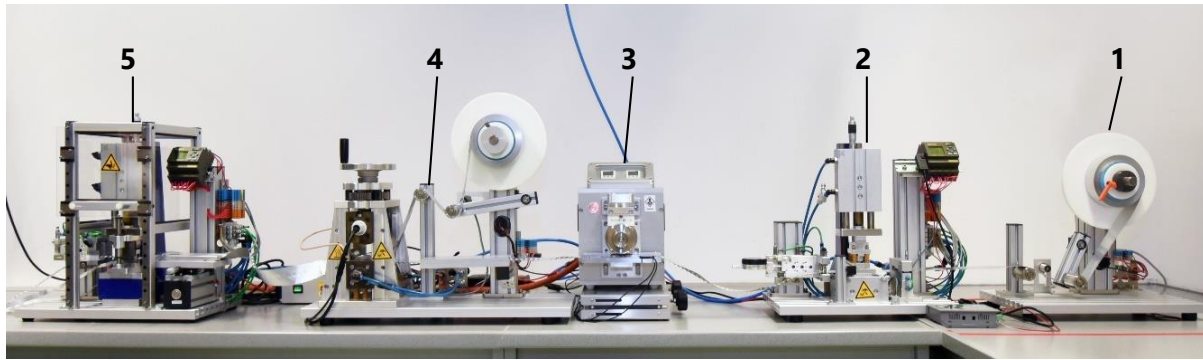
BI drum filler. From right to left: Foil holder (1), blister former (2), filling element (3), sealing element (4), cutting element (5). © Boehringer Ingelheim
